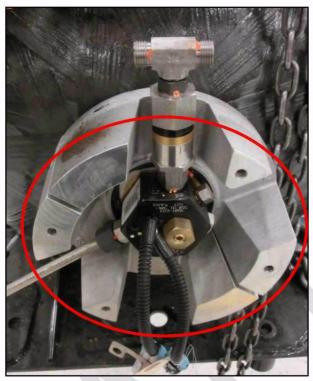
High Pressure Lock-Off Sub-Subsystem – Assembled
